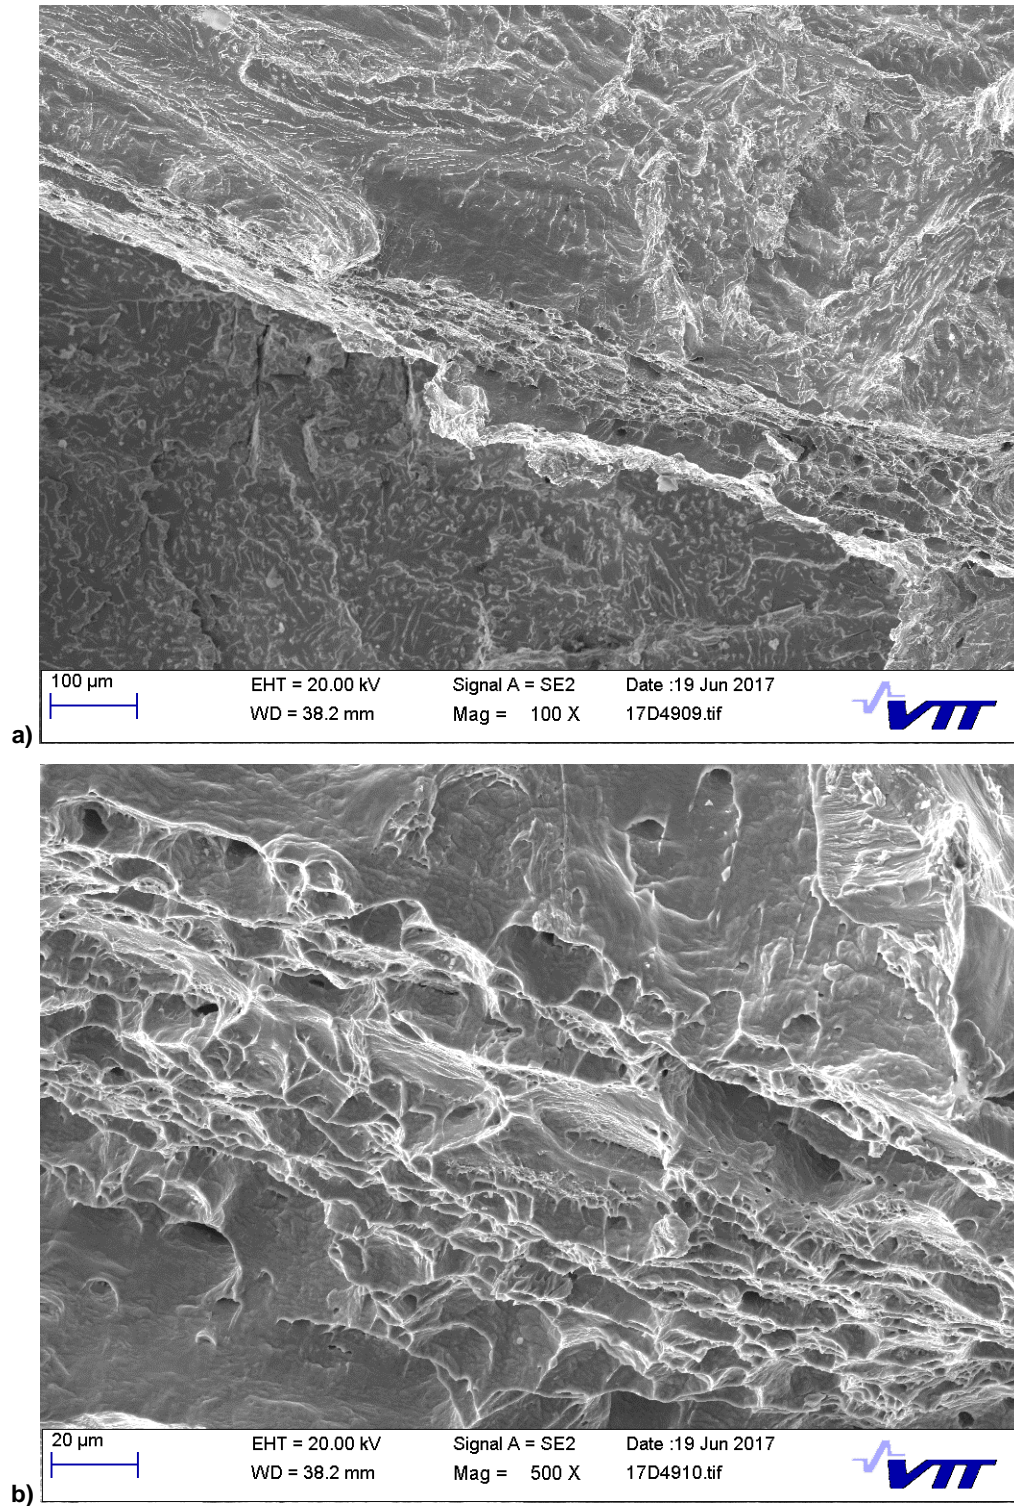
Fracture surface from the middle of the sample, showing level changes and dimples. (a) Outer surface on top, fracture propagation from top to bottom; (b) detail of the fracture surface in (a).
